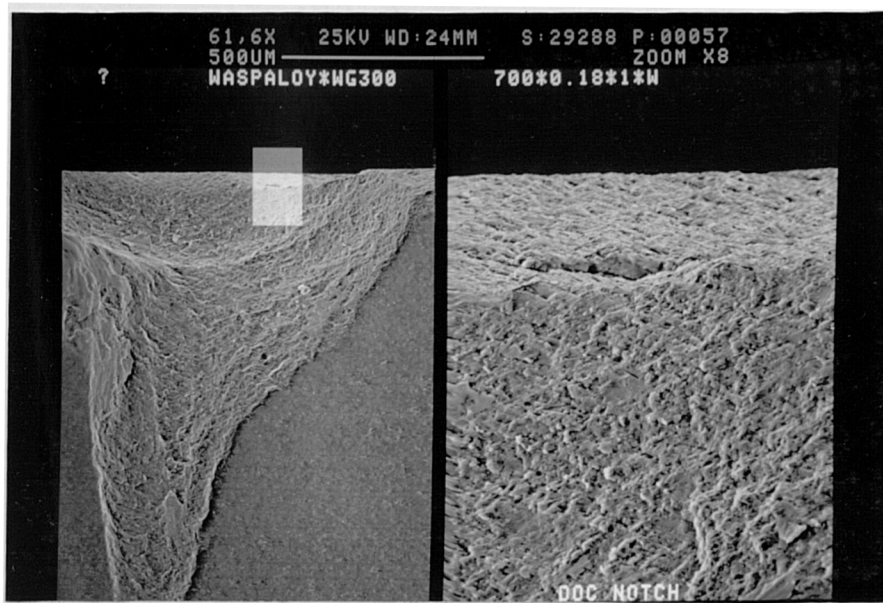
Crack running across the DOC notch area of WG-300 after machining of Waspaloy (V=215m/min, DOC=1mm, F=0.18mm/rev, Wet)
